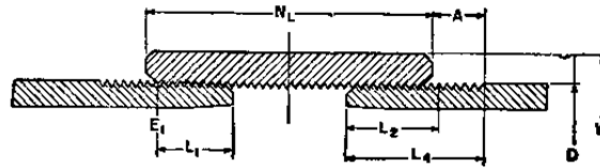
Dimensions of Hand Tight Assembly for Use with Table X3.1
